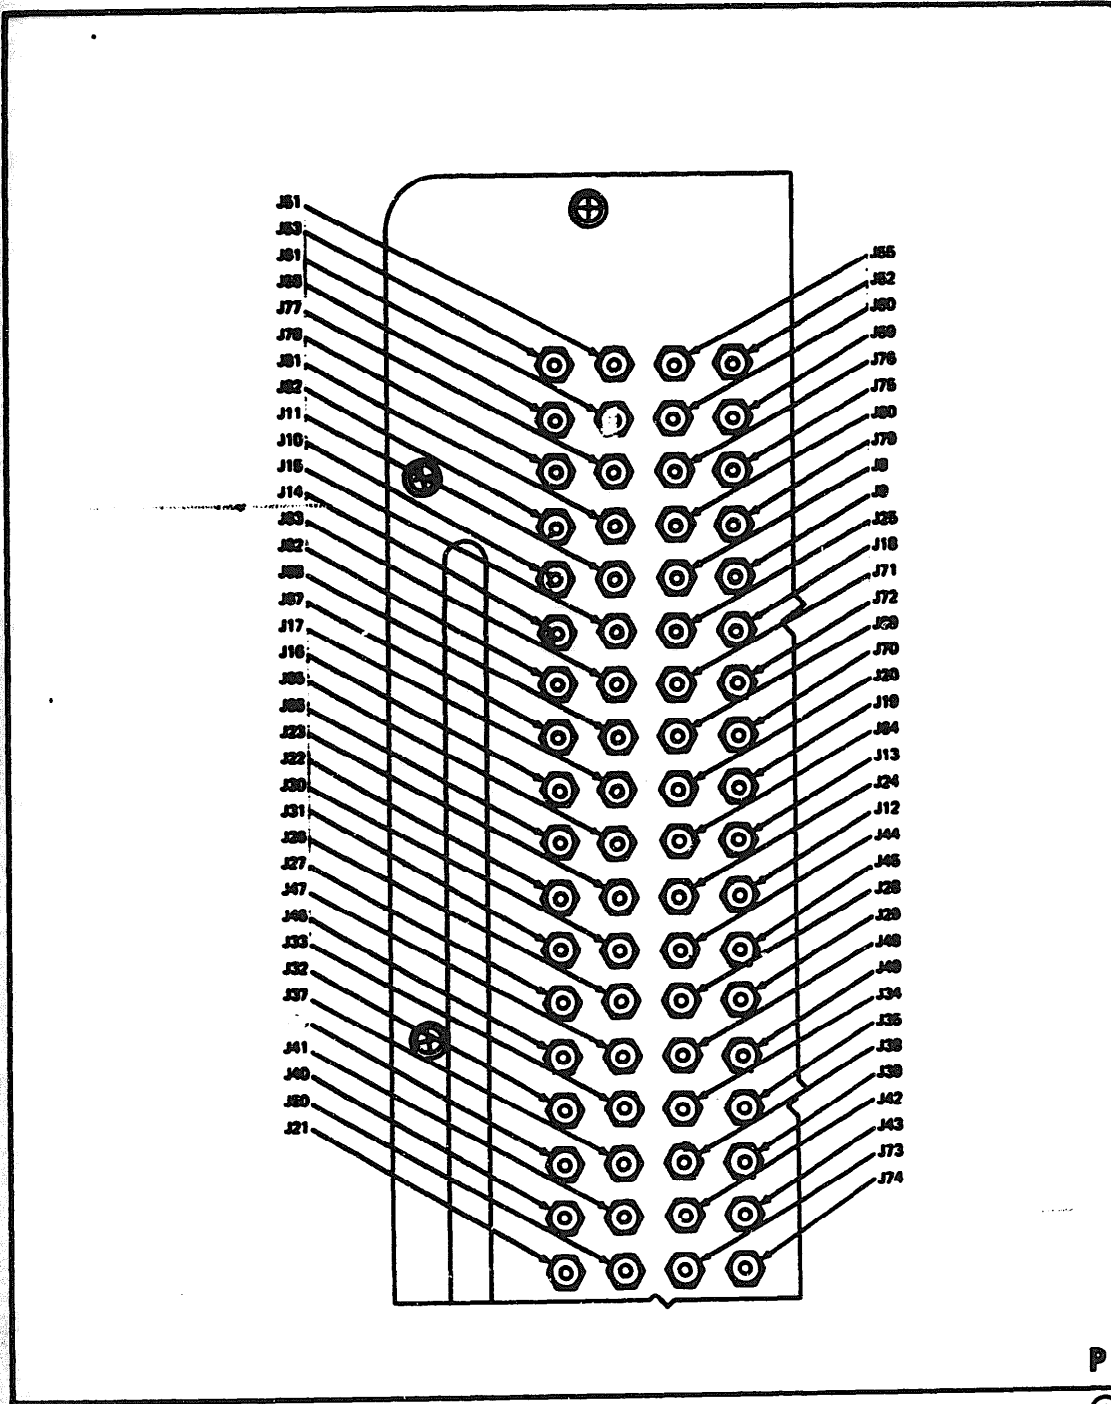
(P) . Panel assembly 1A3, parts location (part 5 of 5).
